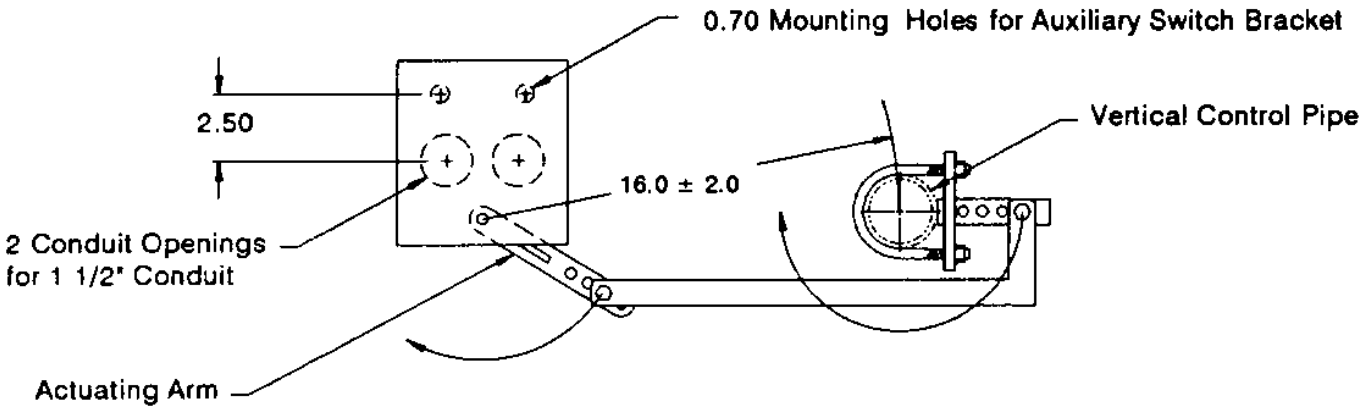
Auxilliary Switch Mounted on Control Pipe, Top View
